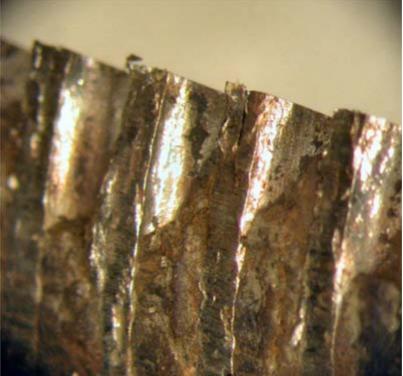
Light optical photos showing polishing wear contacts in upper part of thread flanks.
